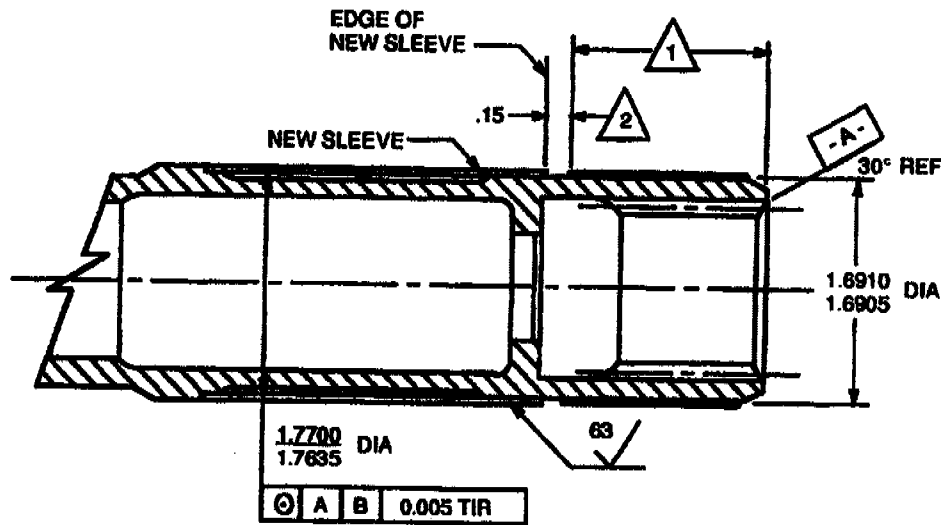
Sun Gear Sleeve Replacement (Sheet 1 of 3).
